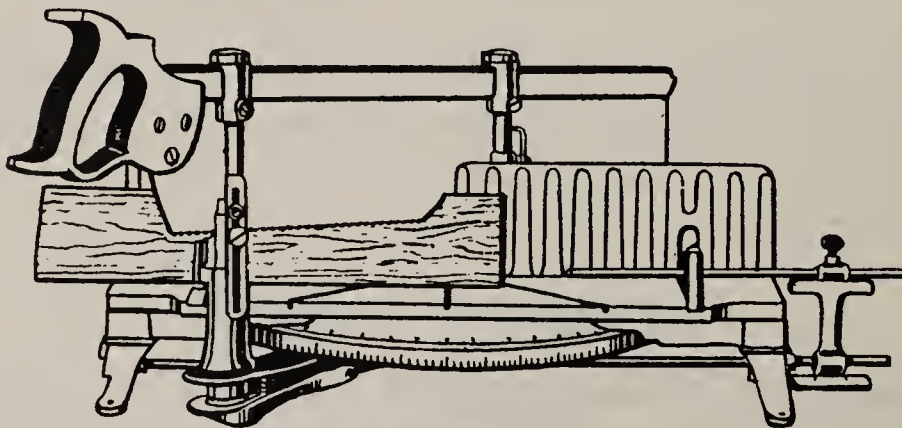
Miter box. The saw-guide uprights are securely clamped in tapered sockets in the swivel arm and can be adjusted to hold the saw without play and also to counteract a saw that does not run true because of improper setting or filing. The second socket in the swivel arm permits the use of a short back saw or allows much longer strokes with the standard miter saw. The swivel arm can be set by a pin stop at the commonly used angles. The edge of the base is graduated in degrees and the swivel arm can be set and automatically fastened at any degree desired. The uprights at front and back are graduated in sixteenths of an inch, and movable stops can be set by means of thumbscrews to the depth of the cut desired. Stock guides hold all types of ordinary work, as well as irregular forms, and can be used as length gauges for duplicating short pieces.
